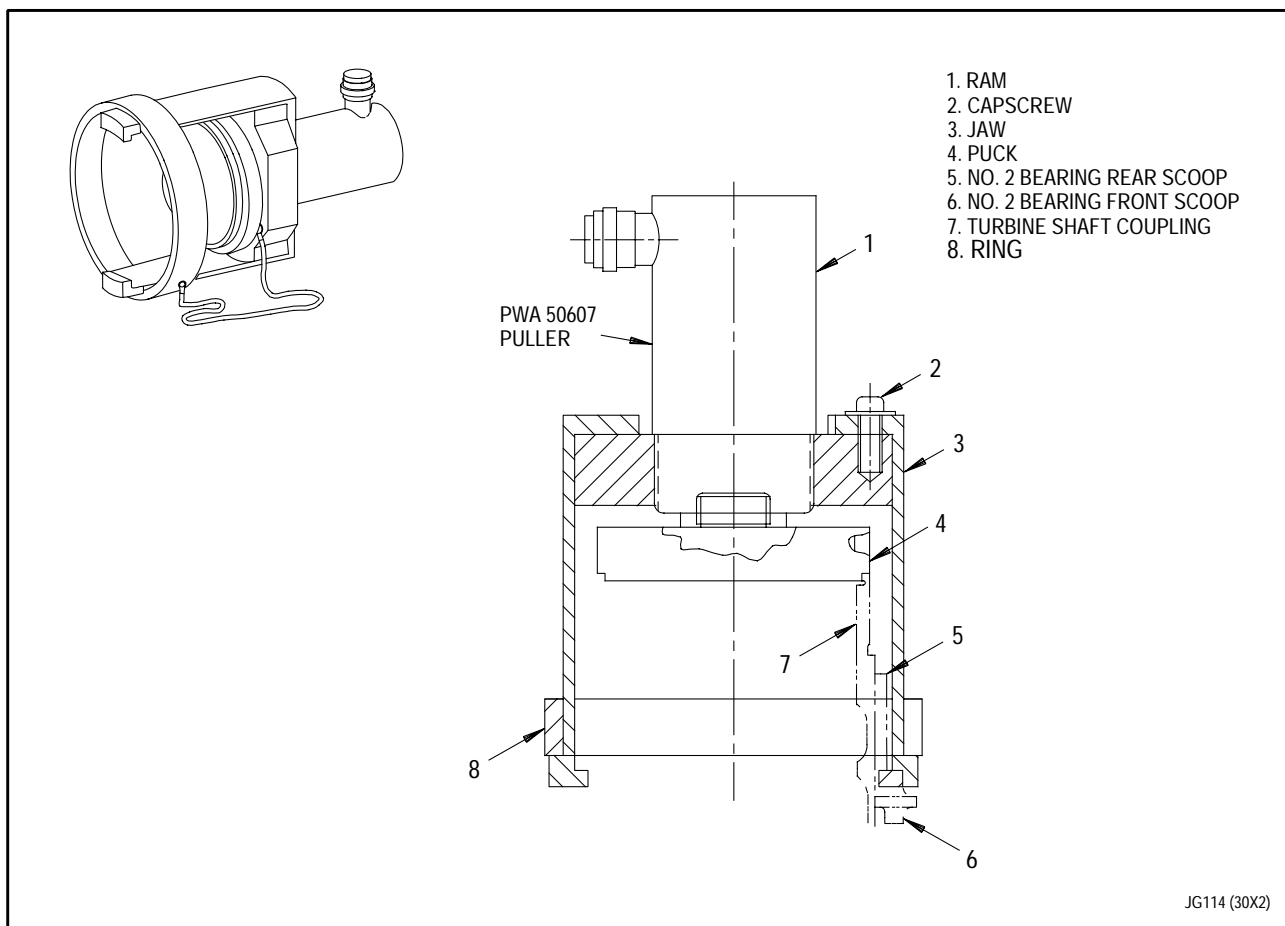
No. 2 Bearing Front Scoop and Rear Scoop - Removal
